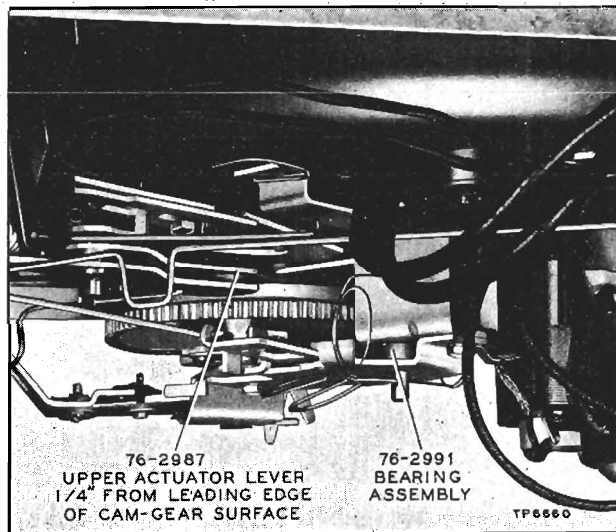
Tone-Arm Horizontal Timing Adjustment, Showing Upper Actuator Lever in Contact with Cam Gear
